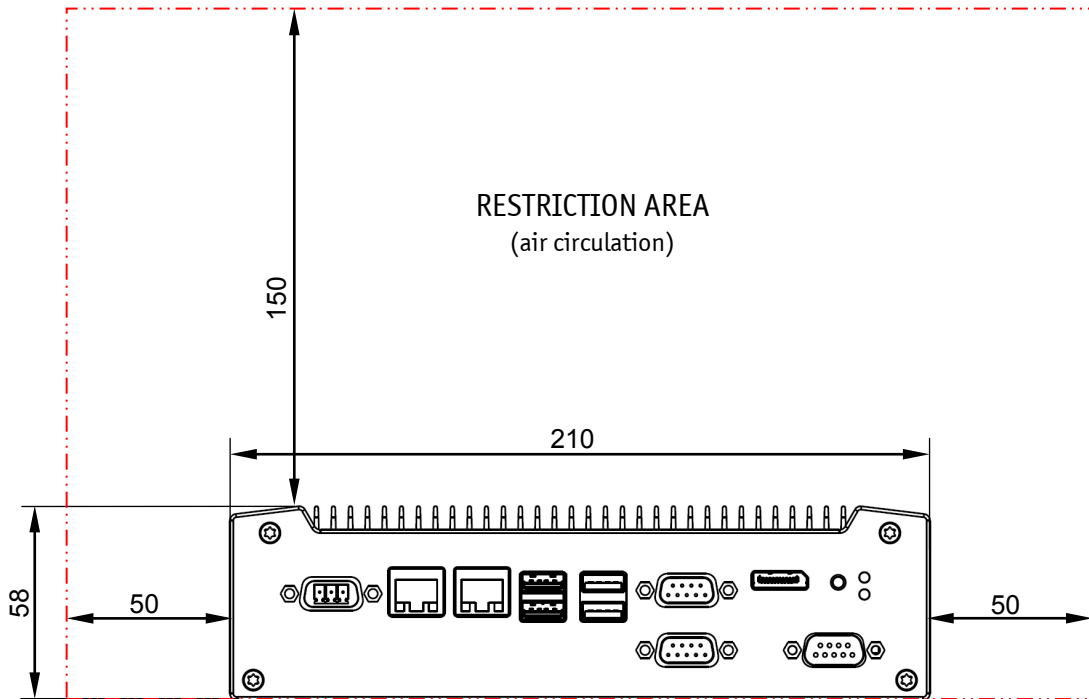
Dimensions in front view (by use of the DIN Rail clip)
